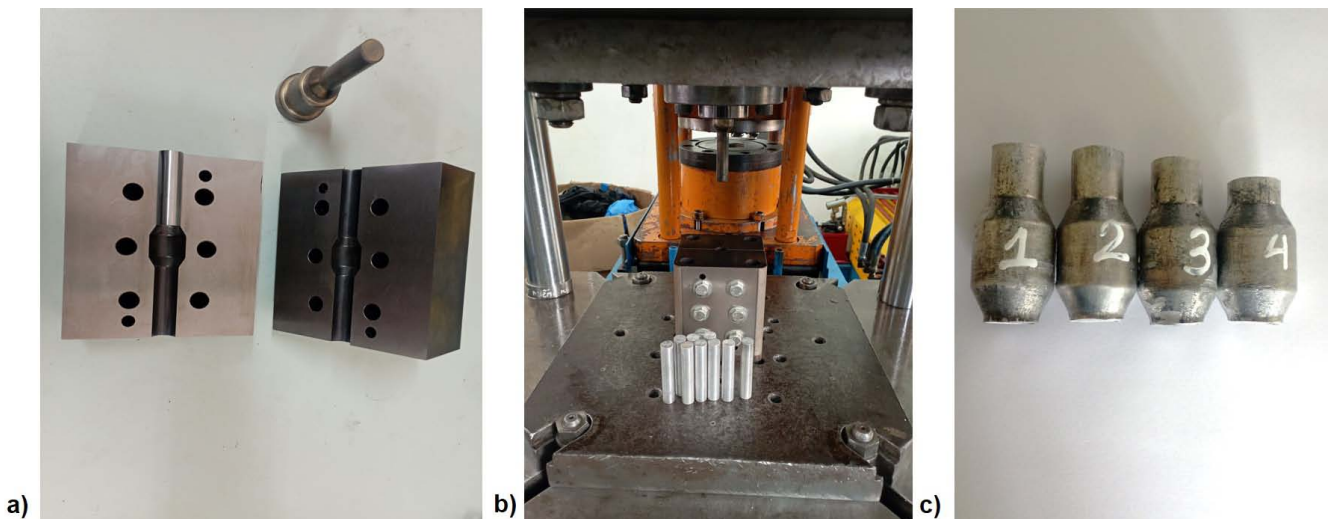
Deformation dies (a) and hydraulic press (b) and deformed specimens (c)
